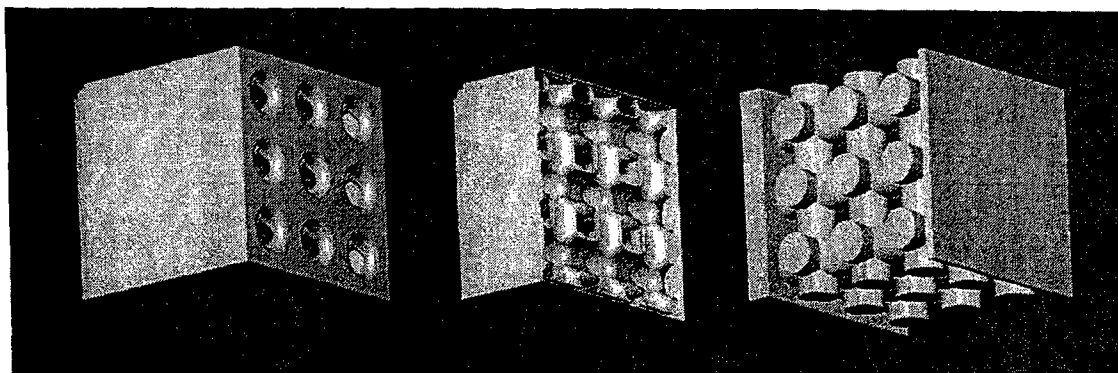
CAD files developed to evaluate capability of the system to create complex parts. Left: CAD model for expendable mold. Center: Cross-section of mold. Right: Shape of resulting object (cast into the expendable mold).
